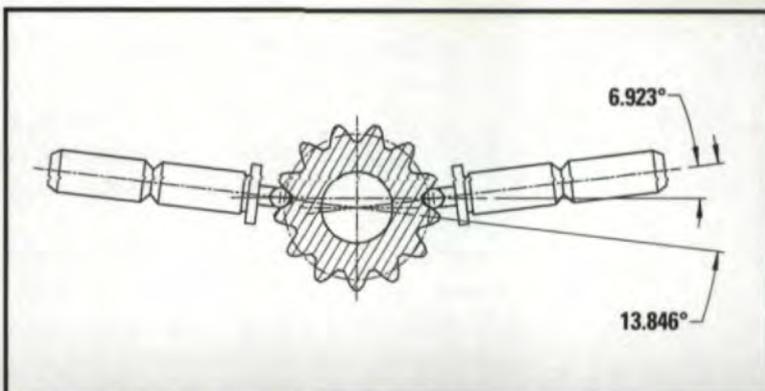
Pin anvils removed from micrometer with pins fully engaged in tooth spaces of gear.
